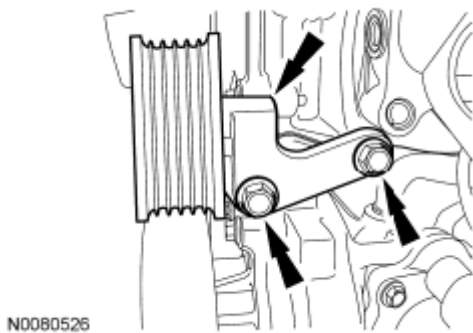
Locating Accessory Drive Belt Idler Pulley Bracket Bolts
